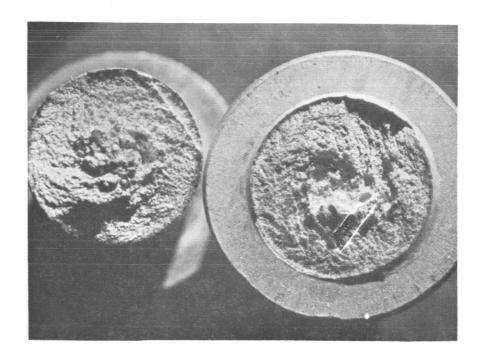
FIGURE SURFACES, SPECIMEN 5, 8X
